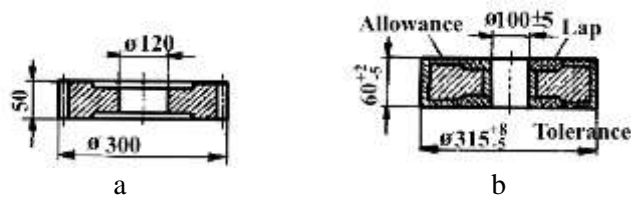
Drawings of the gear (a) and the forging (b)
